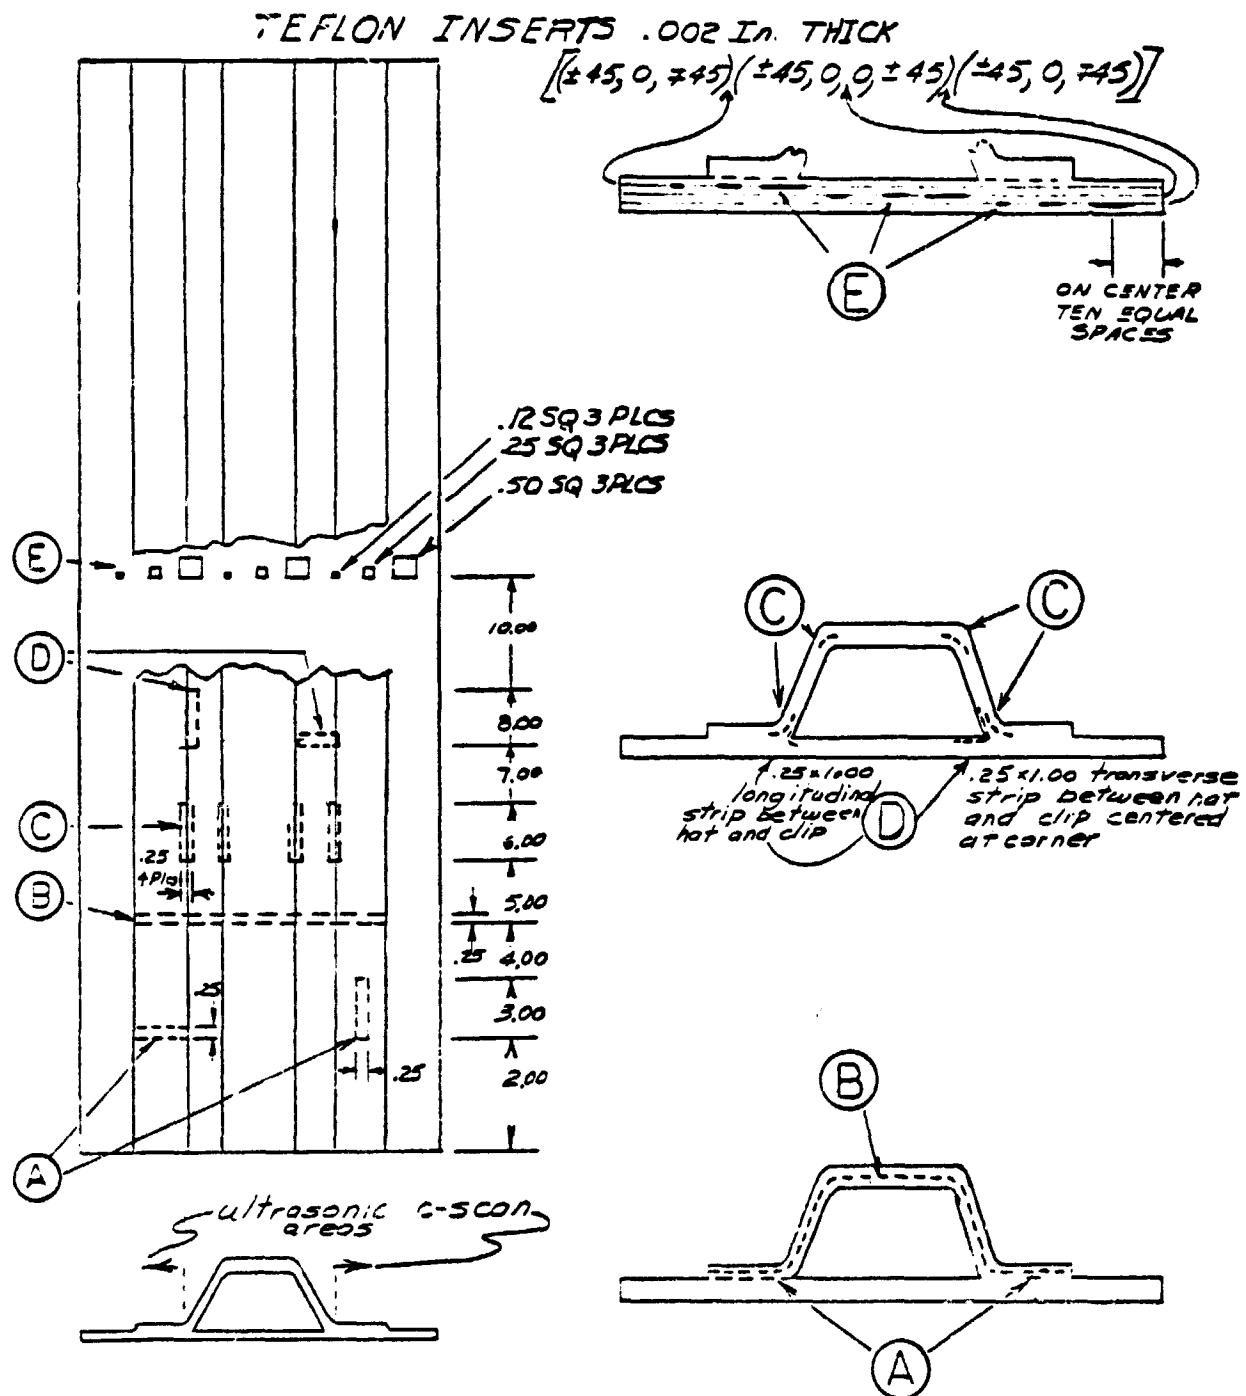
Layout of Trim and Testing to be Performed on Tool and Production Graphite/Epoxy Panels
